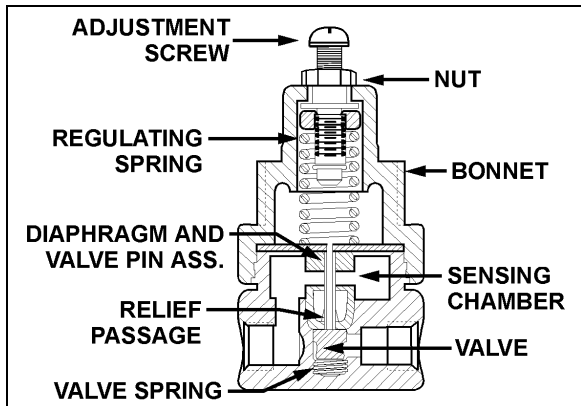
AIR PRESSURE REGULATING VALVE 12141A
